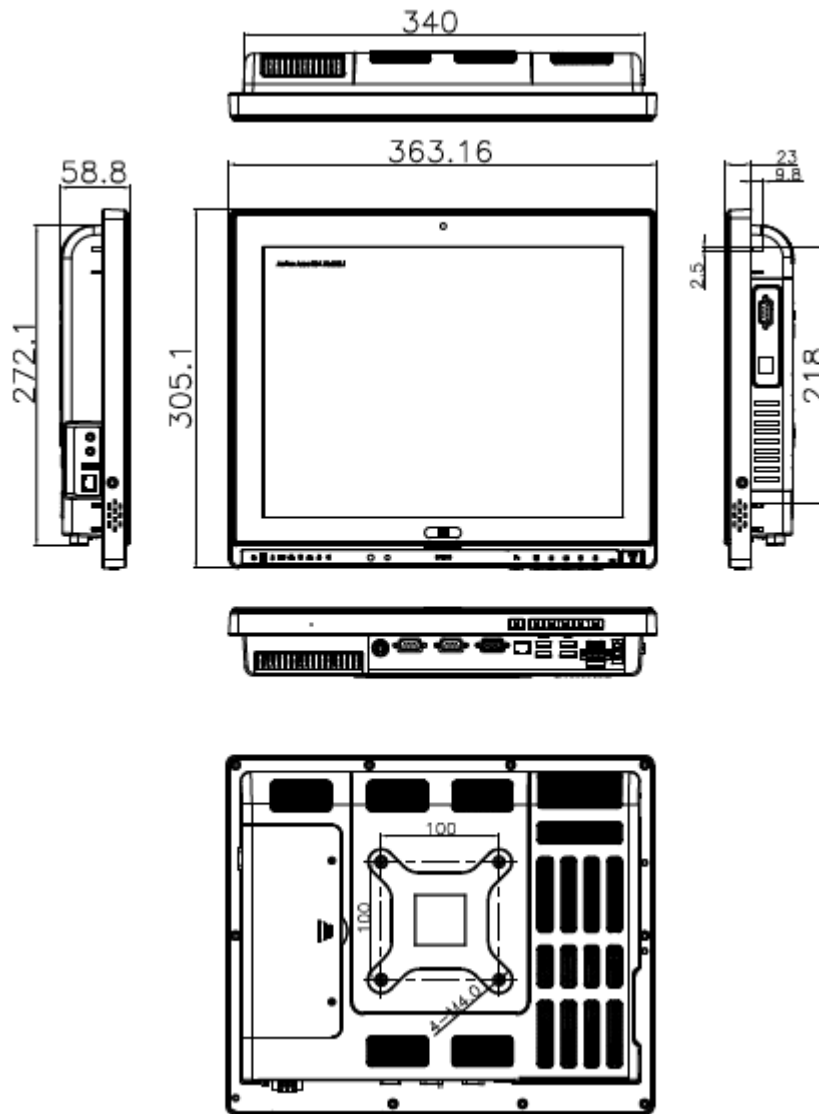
AFL2-15A-H61 Dimensions (mm)
